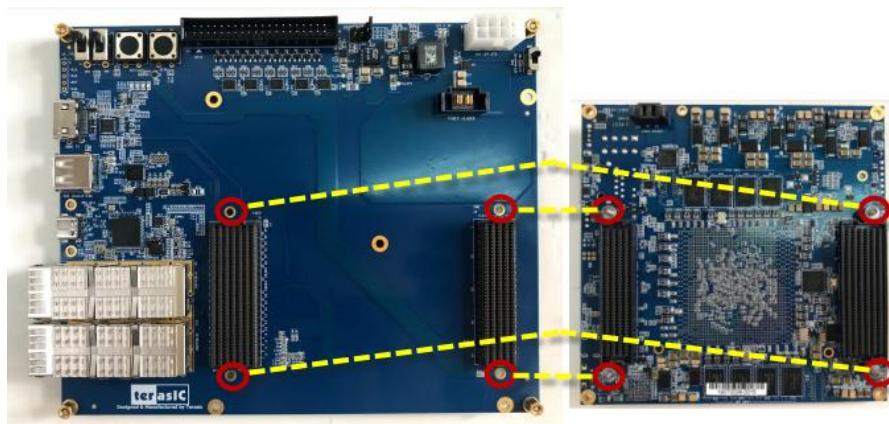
Place Apollo Carrier Board over four JSOM-T
